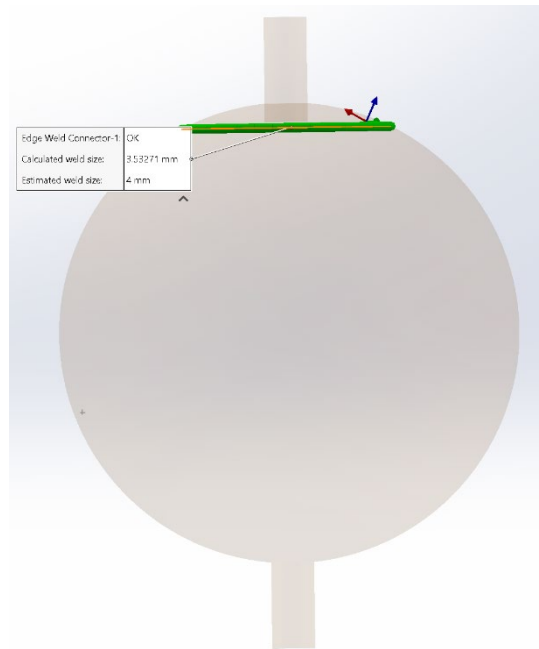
Part-Within-Part PV Weldment @ 1600 PSI
